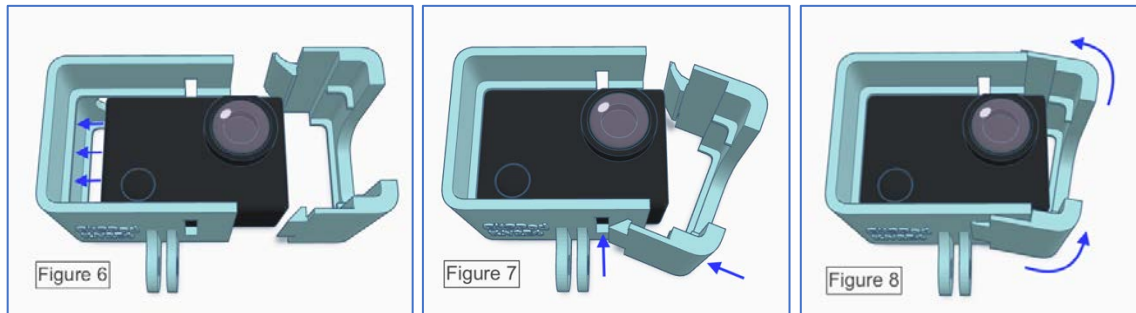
Install Camera pt. 1 Figure 7 - Install Camera pt. 2 Figure 8 - Install Camera pt. 3
